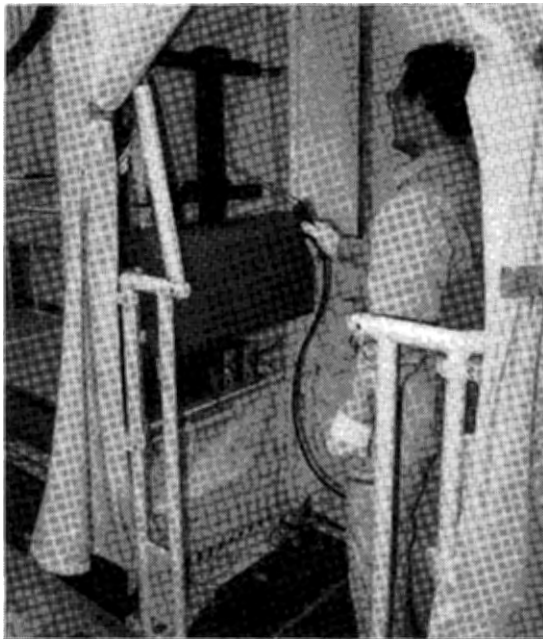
Experiment for measuring limits of welding tasks.
